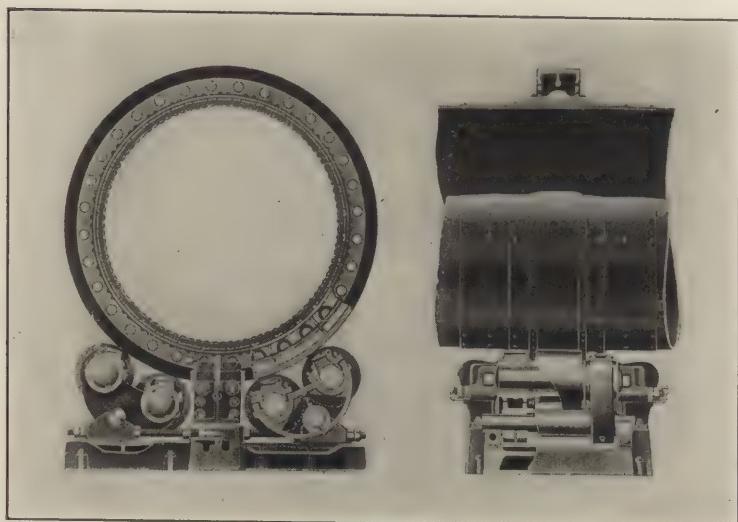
Method of supporting kiln—tire and bearings. Vulcan Iron Works.
